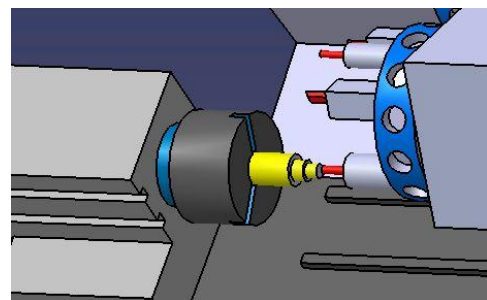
Work-piece held by a spindle and processed by a cutting tool mounted on a turret
